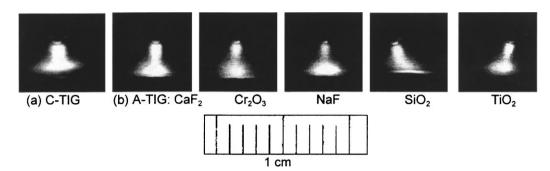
Images of the arc in welding: (a) CTIG; (b) ATIG.
